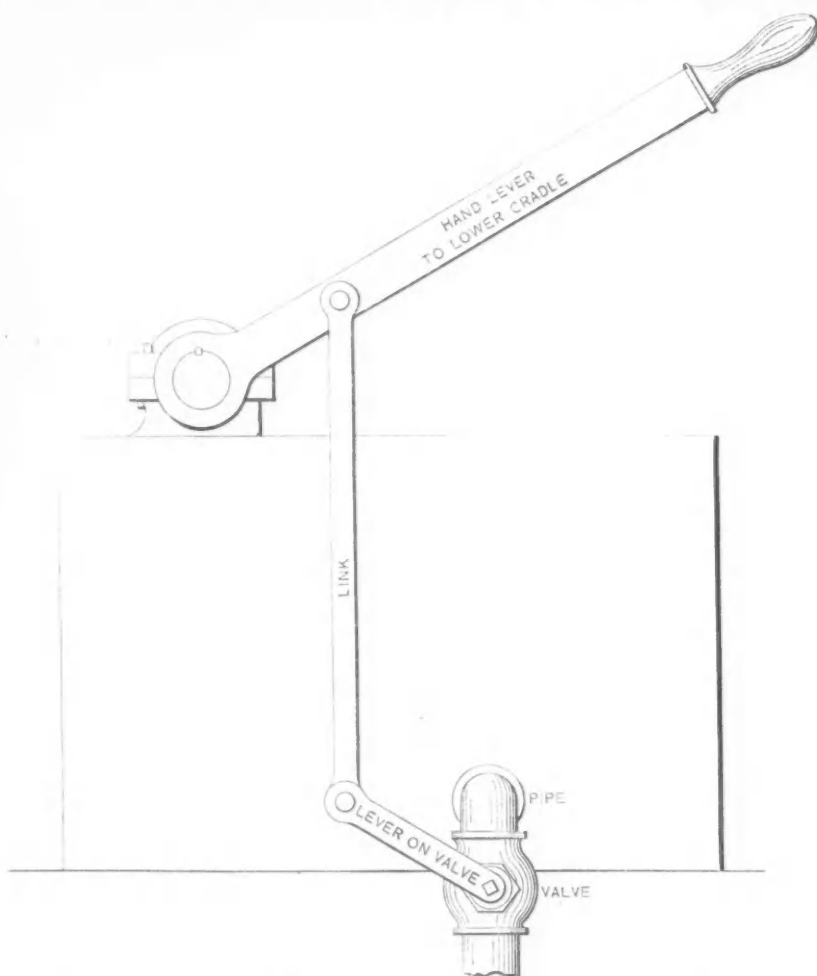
Diagram of Raising and Lowering Lever and Spray Pipe Valve Gear.
